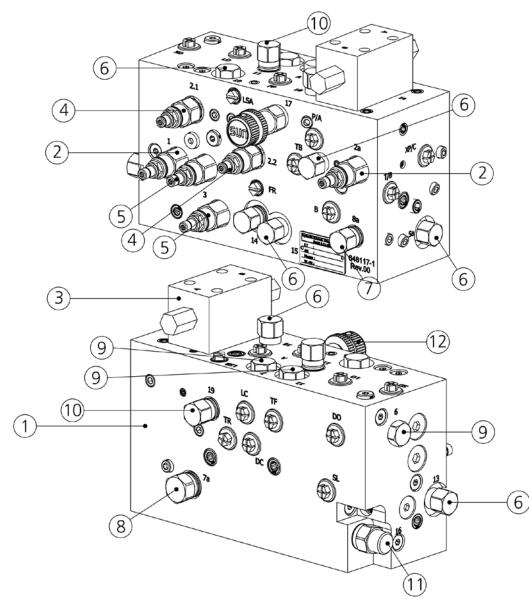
648117-1 Hydraulic Manifold Assembly
